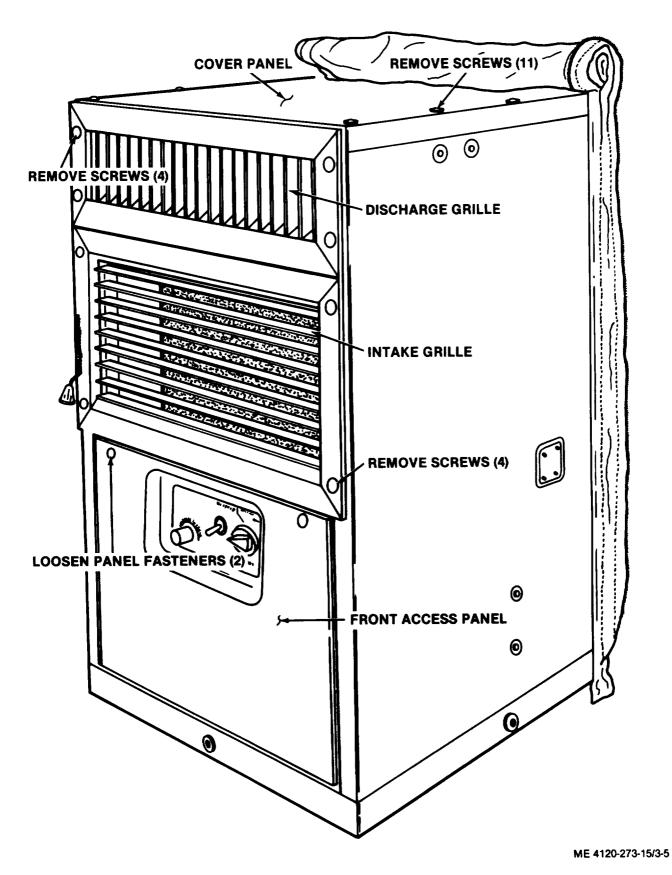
Discharge grille, intake grille, front access panel and cover panel removal and installation.
